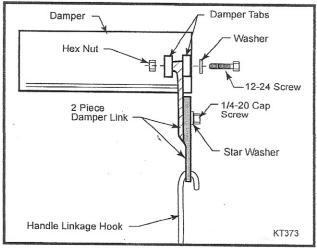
Align upper hole of damper link with holes in damper tabs. Attach with 12-24 screw, washer and hex nut.
